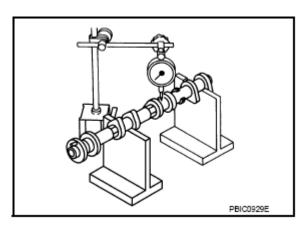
Measuring Camshaft (EXH) Runout Using Dial Indicator Courtesy of NISSAN NORTH AMERICA, INC.
